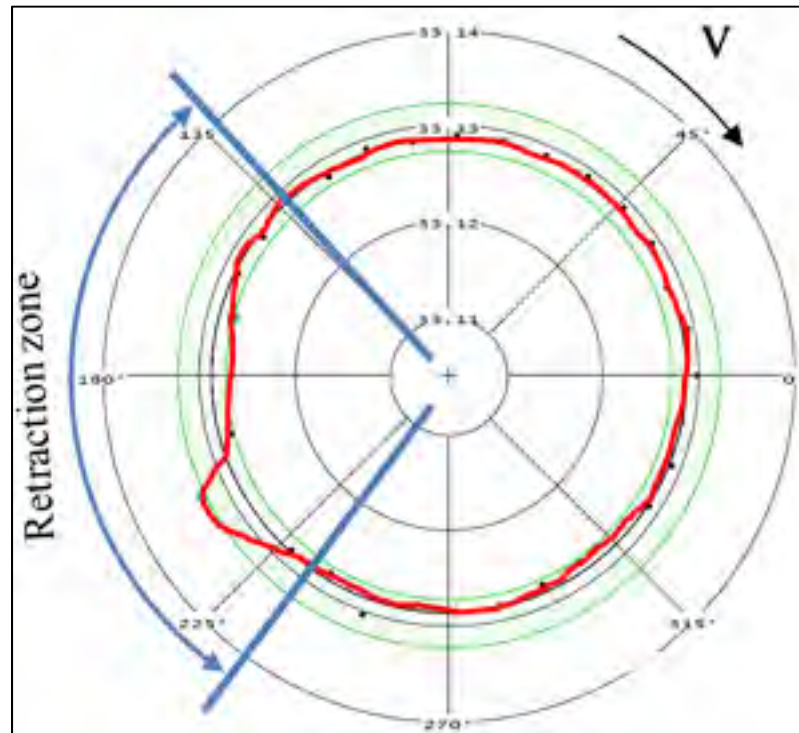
Circularity deviation of the machined workpiece for Trial #2
